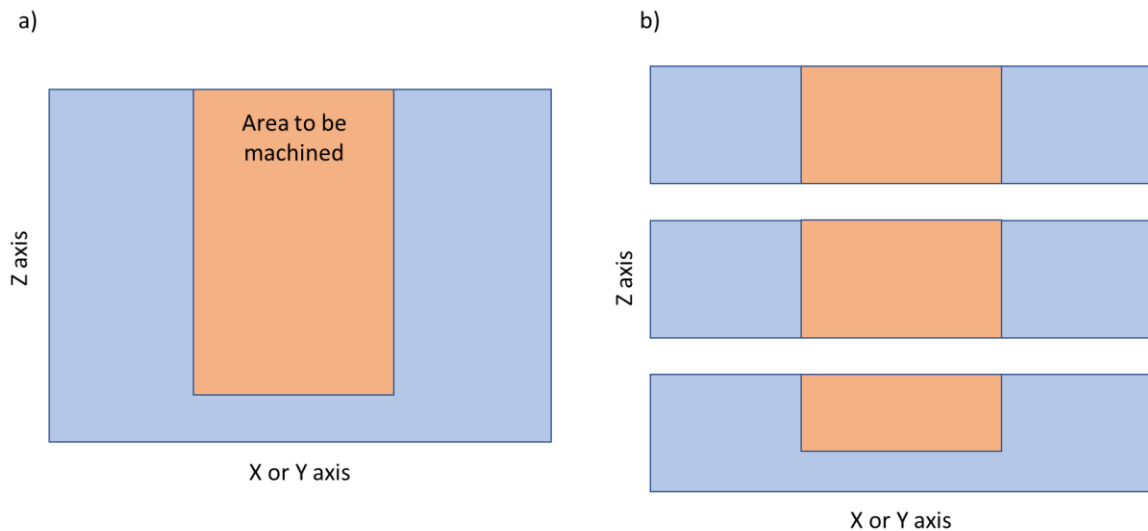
Example of splitting a part into 3 layers such that the tool will not collide with the part and to allow the tool to clear the stock before and during machining.
